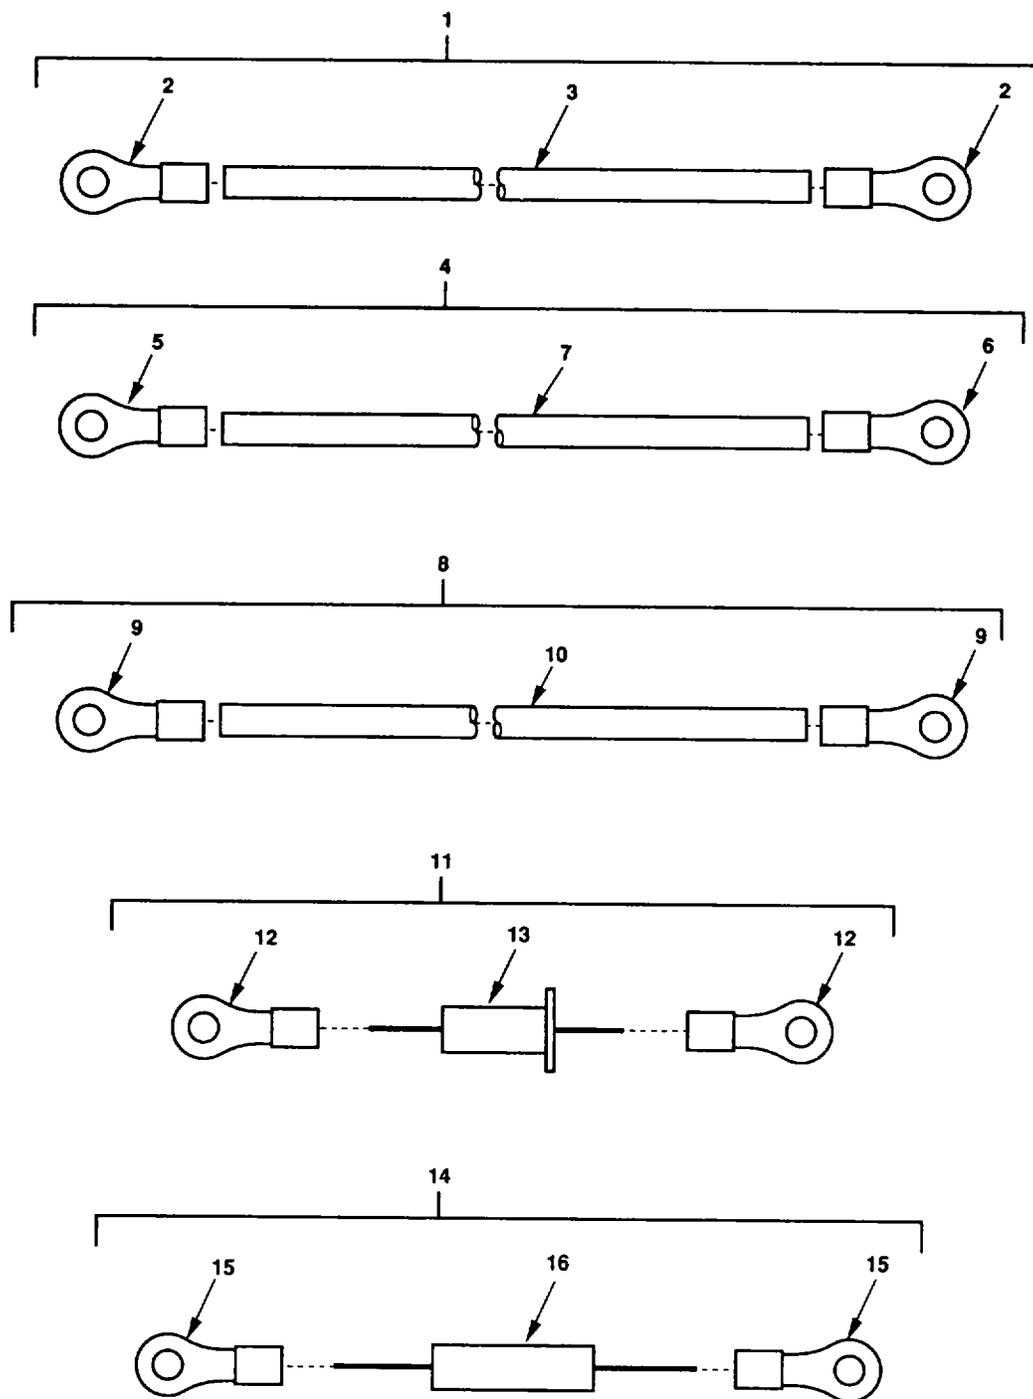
Electrical Lead Assemblies, Diode Assembly, and Resistor Assemblies
